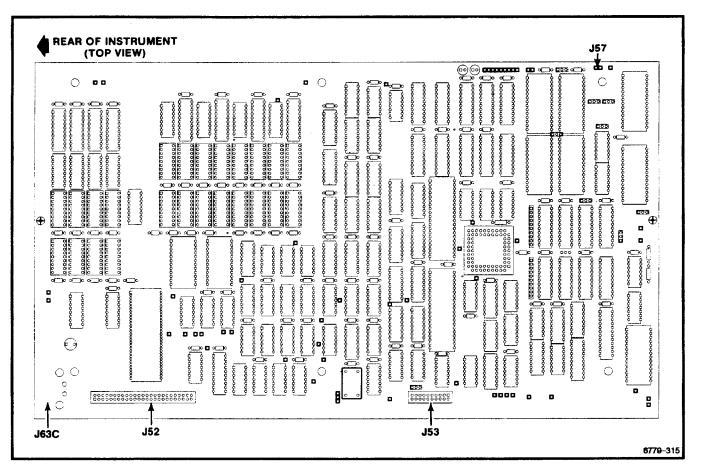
Connector locations for removal of the A7 Display Controller board.
